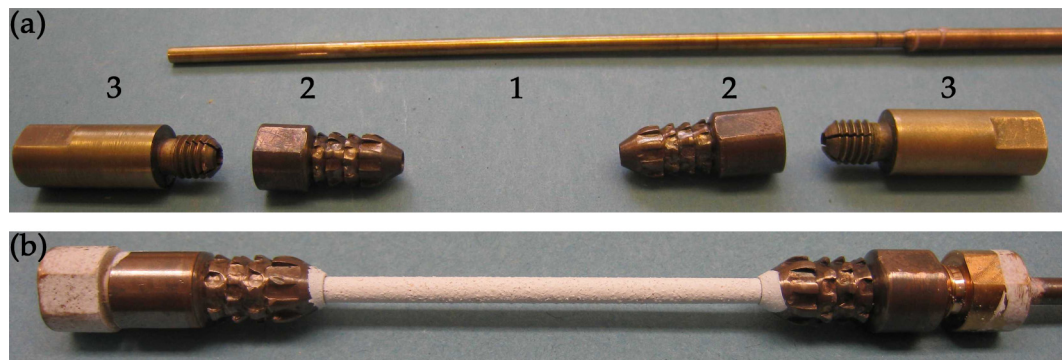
(a) Exploded view of the various parts composing the template: (1) BeCu rode; (2) BeCu end-parts; (3) split collets. (b) The template assembled (the central part appears white because it has been spread with a release agent).
